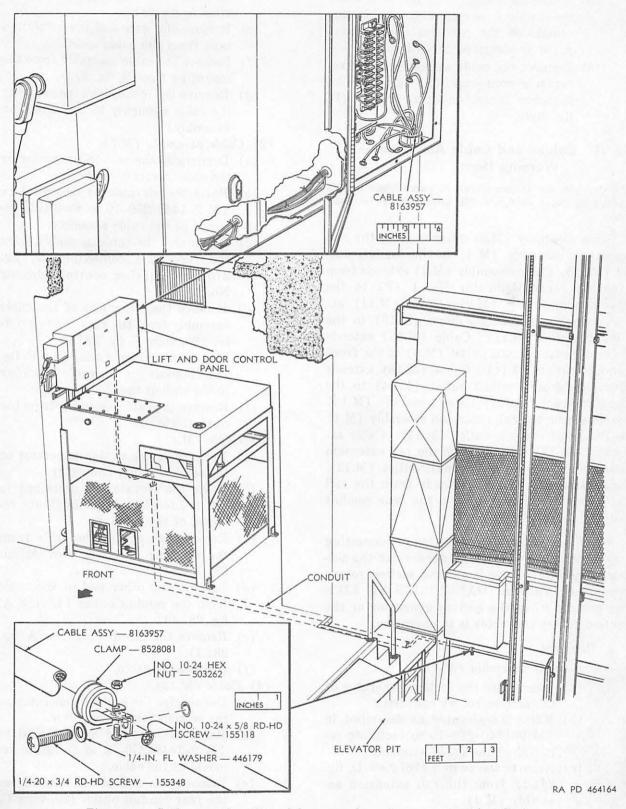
Cable assembly - lift and door control panel - removal and installation.
